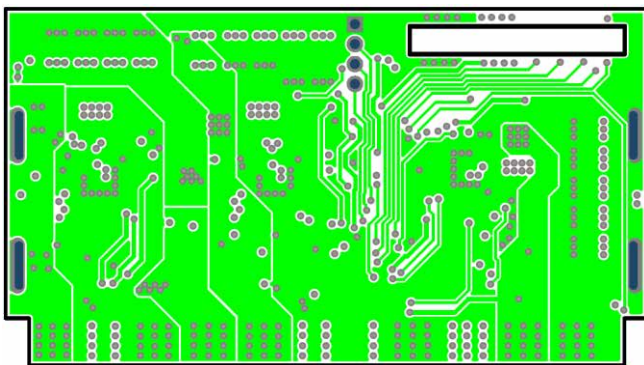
DC-DC Block Daughter Board (Inner Layer 1)
